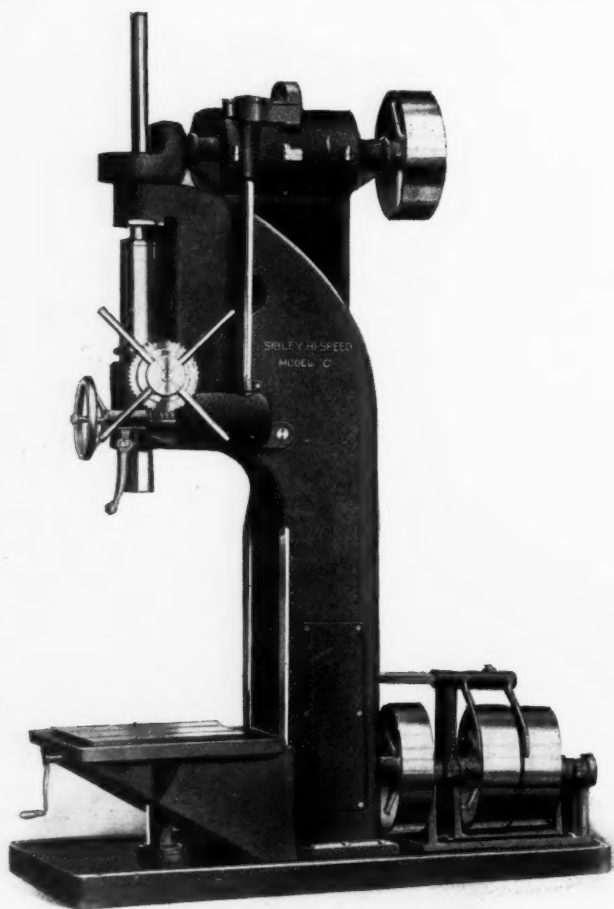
All-geared Drilling Machine, built by Sibley Machine Tool Co.
